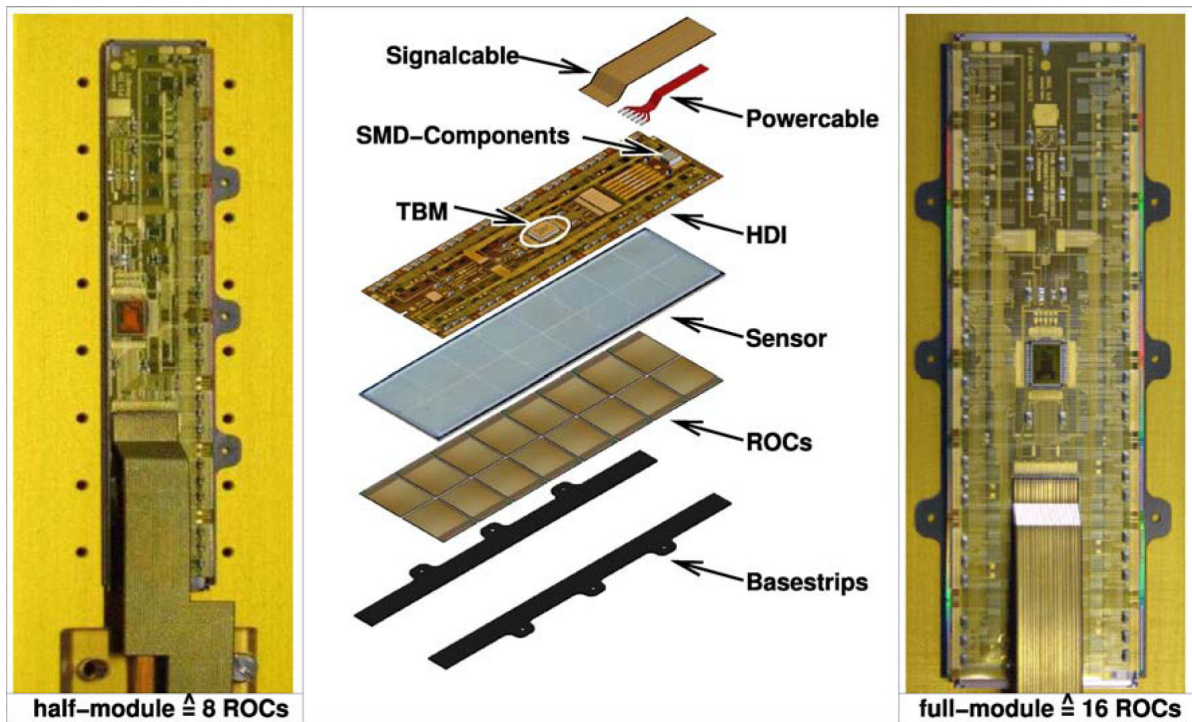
Exploded view (middle) of the barrel pixel detector full module (right) and picture of an assembled half module (left).
